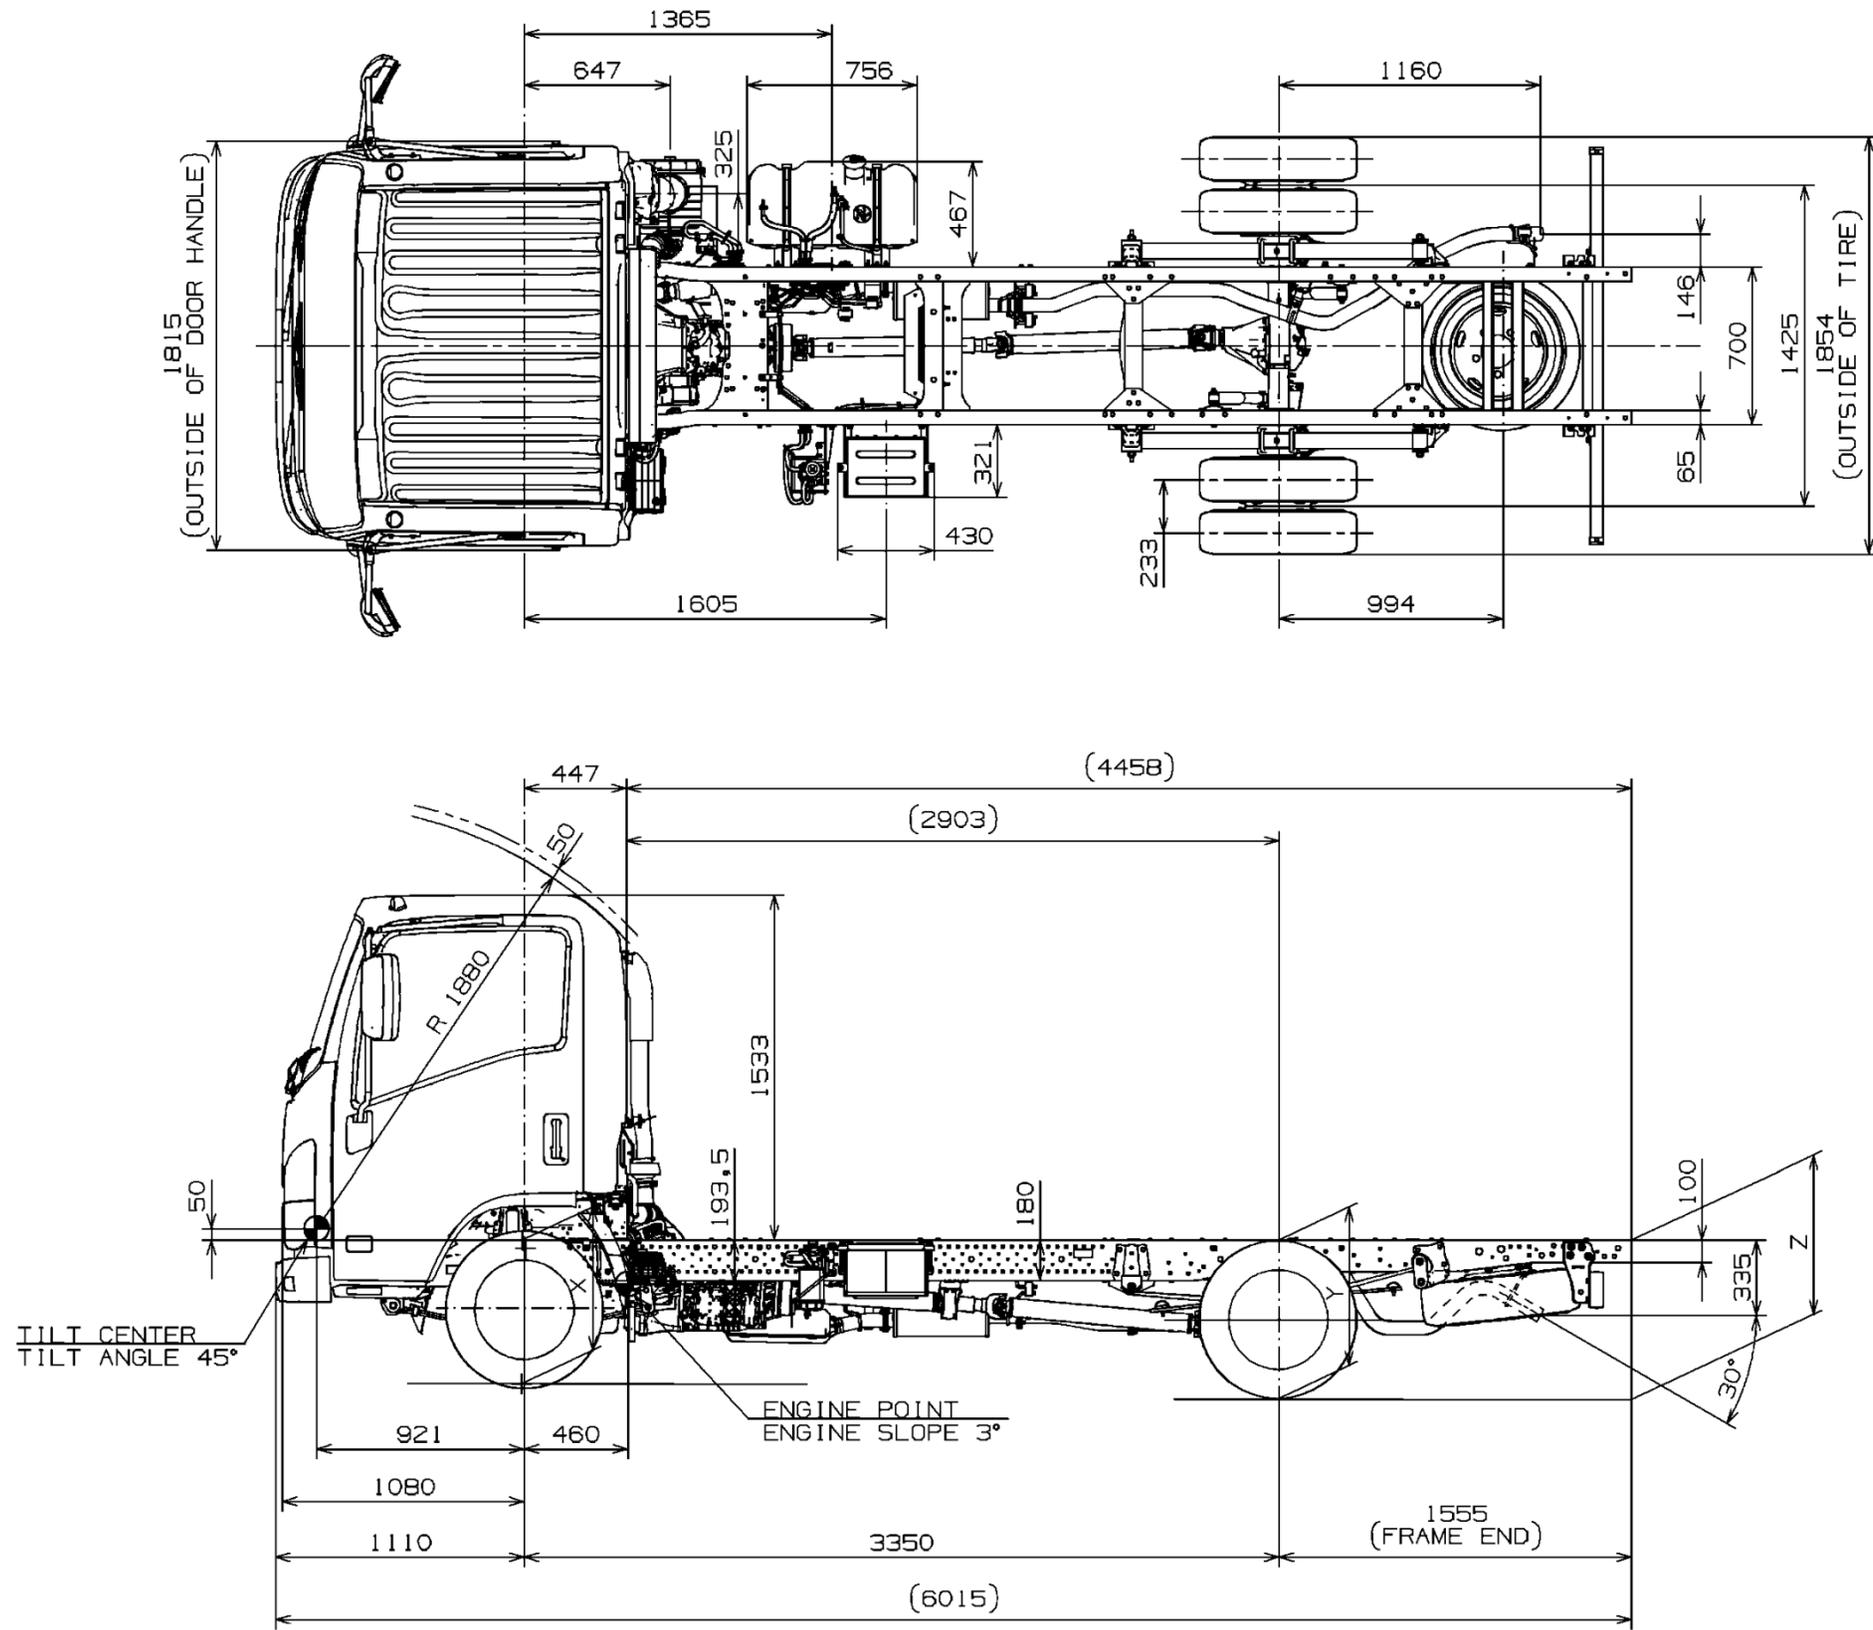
Cab Chassis Drawing NLR85L/U-HD5WYEN
